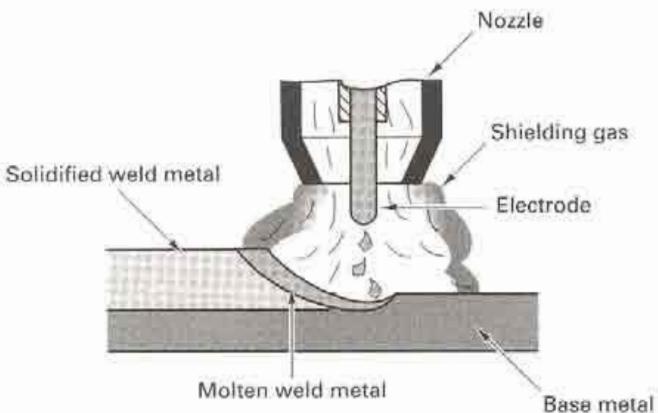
Schematic diagram of gas metal arc welding (GMAW). (Courtesy of American Iron and Steel Institute, Washington, DC.)
